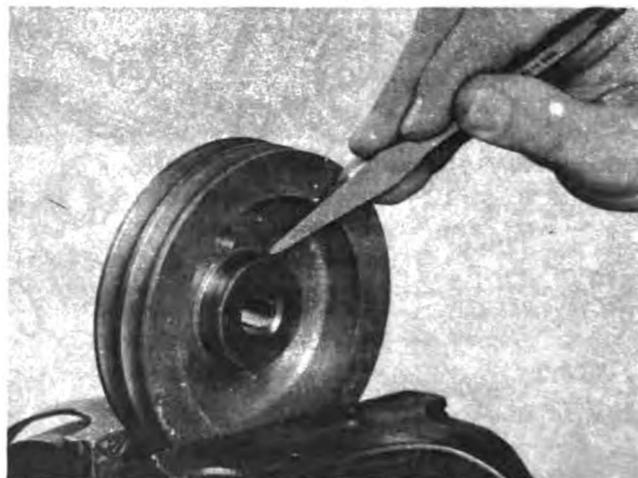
(N10882). Cut The Wear Sleeve.
